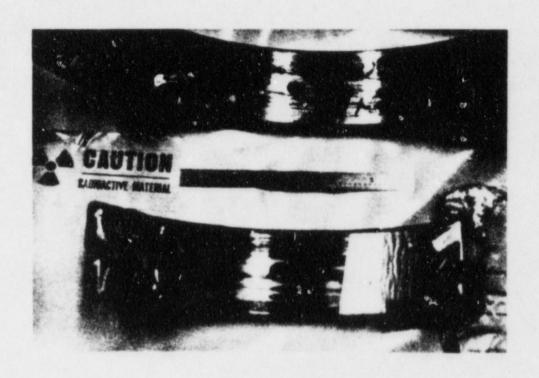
Closeup photo of wear ring segment removed from RHR pump "A" impeller.
